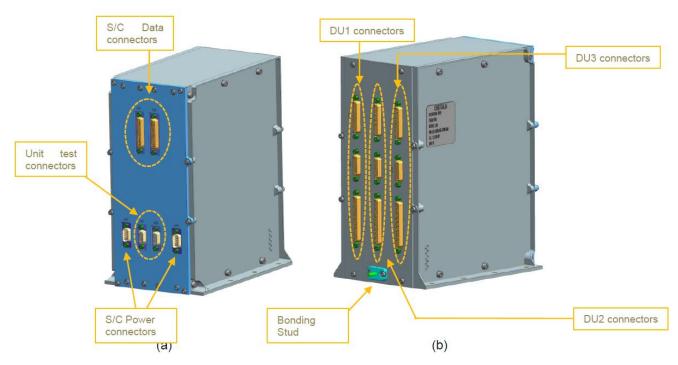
DSU EM mechanical box: front (a) and rear (b) view
